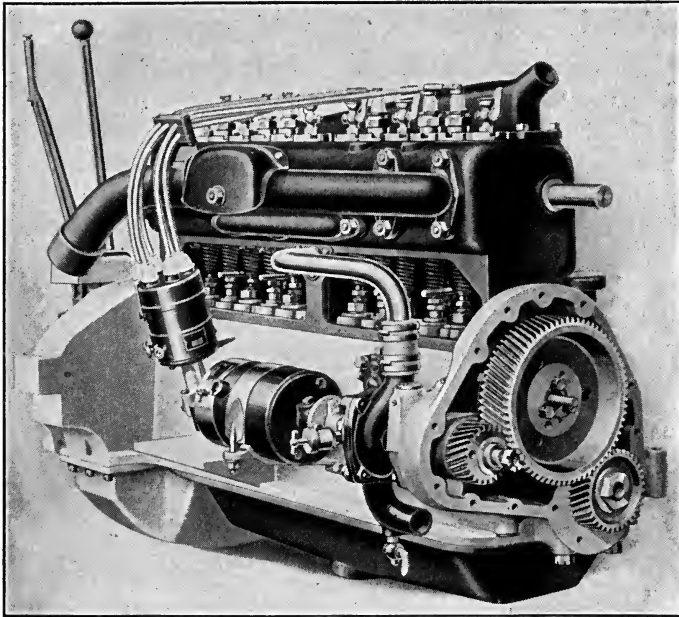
Case continental engine showing Westinghouse ignition unit mounted on generator.
